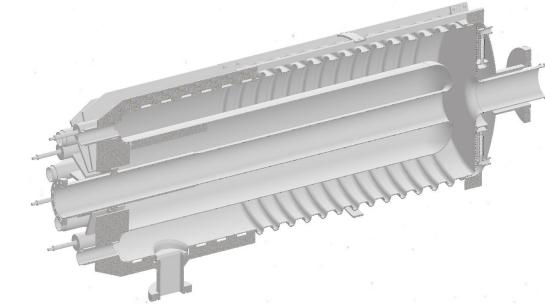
CAD model of a cross section of a BNL 56 MHz quarter wave resonator. Its dimensions, internal geometry, and port placement motivate requirement 1.
